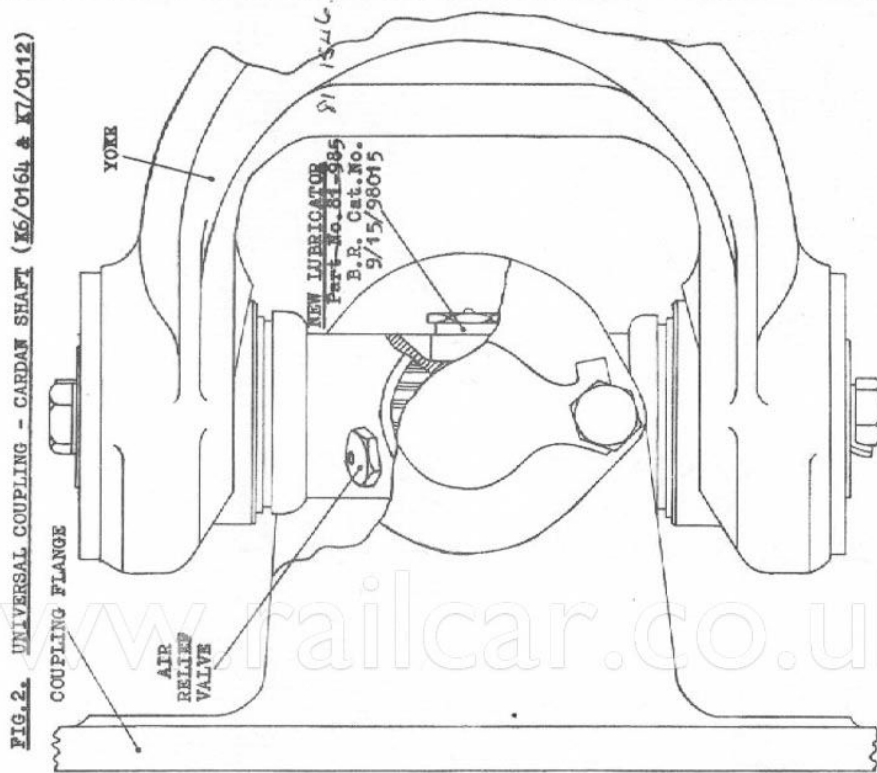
UNIVERSAL COUPLING - CARDAN SHAFT (K6/0164 & K7/0112)
